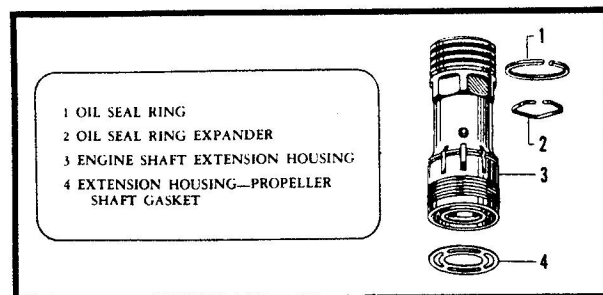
Engine Shaft Extension Assembly for Single-Acting Model 33E60
